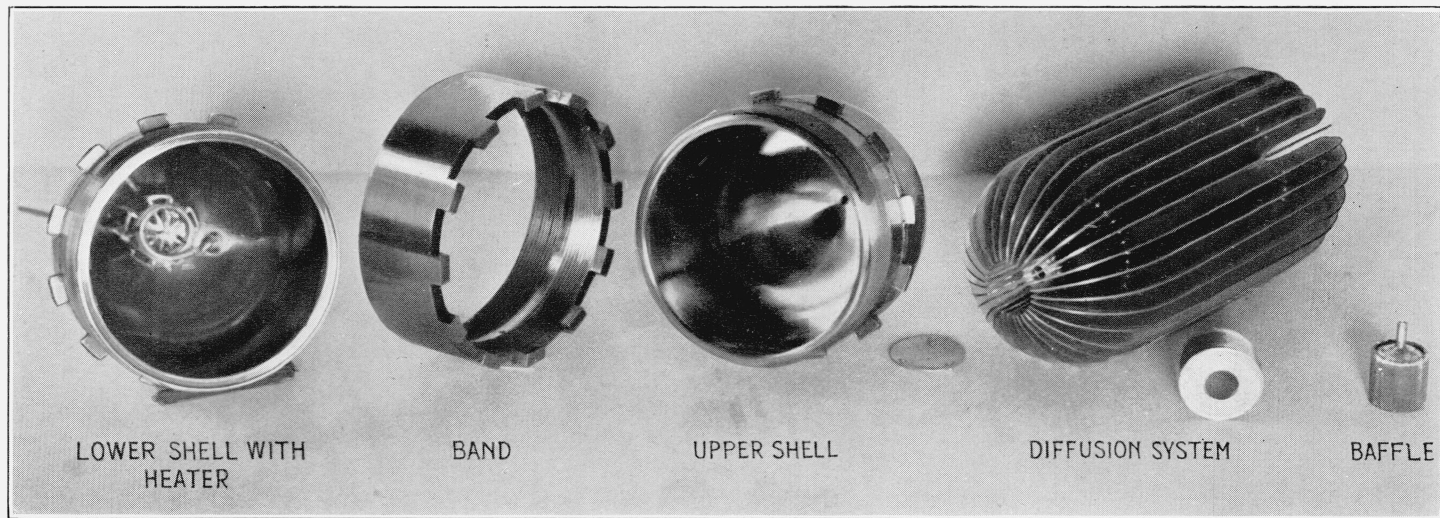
Unassembled calorimeter shell with accessory parts.
